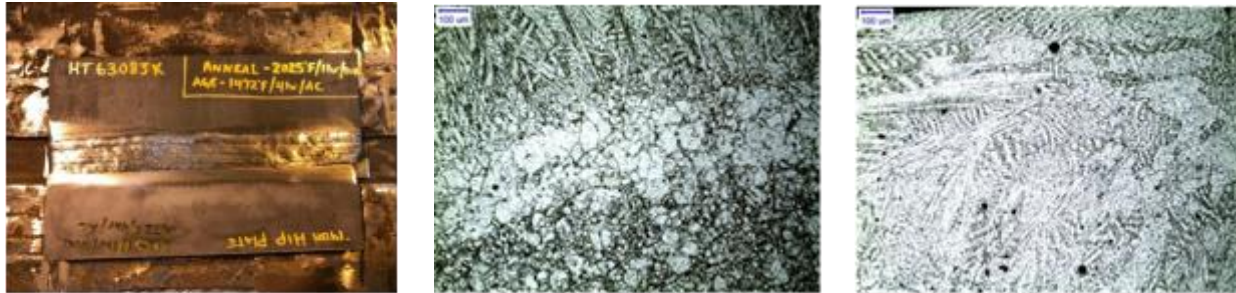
Left: Completed GTA weld of HIP plate to cast/wrought plate, Center: Fusion line showing coarse grain HAZ, Right: Weld deposit showing scattered argon gas porosity [18].
